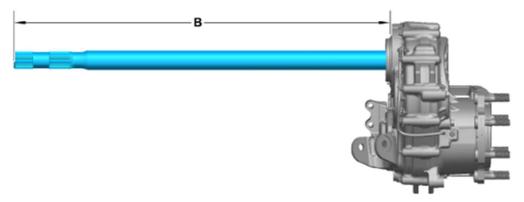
Right hub reduction gear, B installed dimension: 743.3 mm ±1.5 mm
